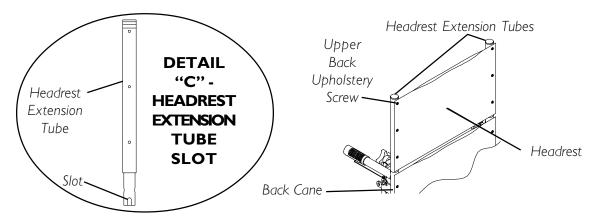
INSTALLING THE HEADREST AND PILLOW
